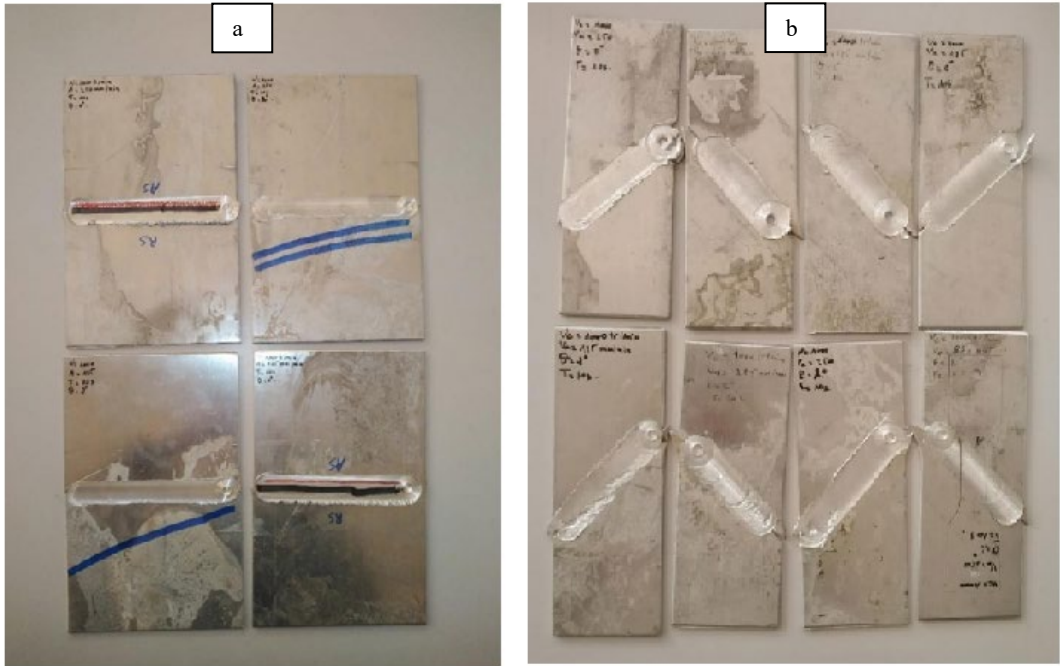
Example of welded joints obtained with different welding velocity:
